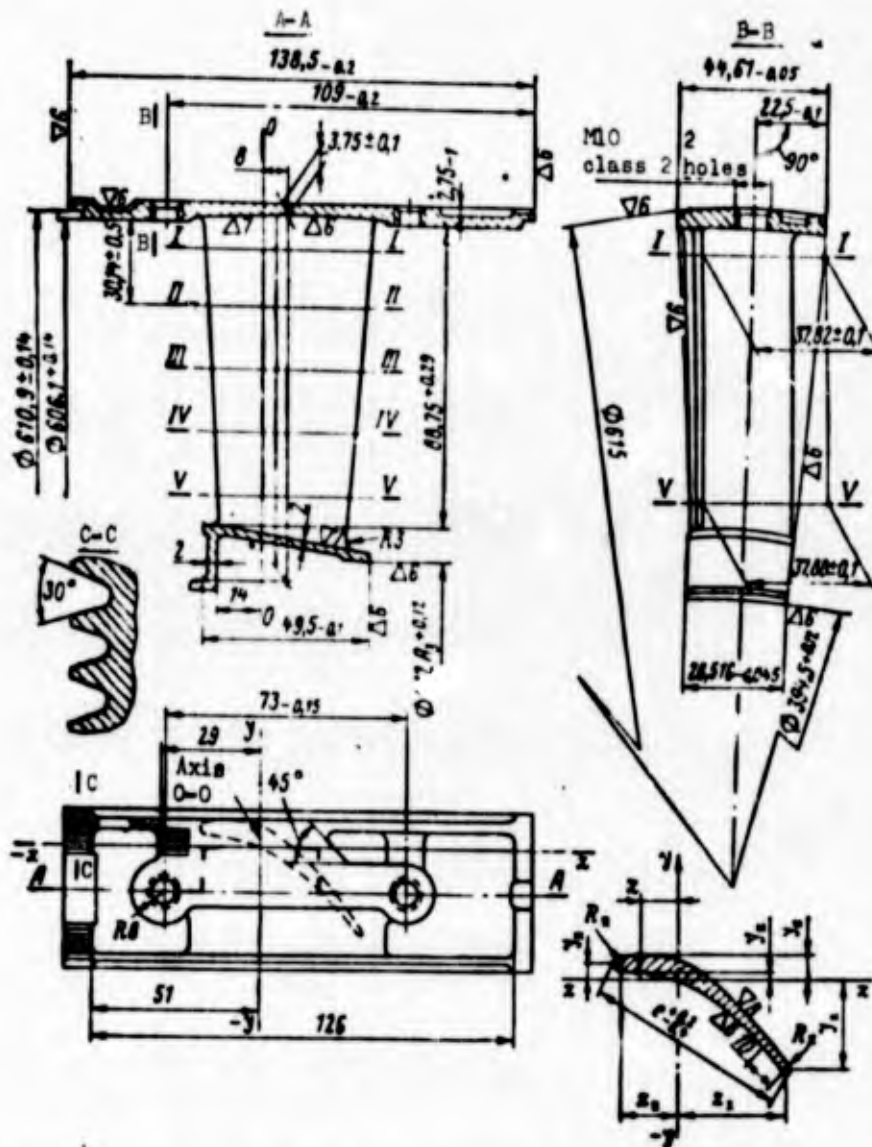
Blade of turbine stator of gas-turbine engine. [κ = bucket; η = [?]; c = back; x = root.]
